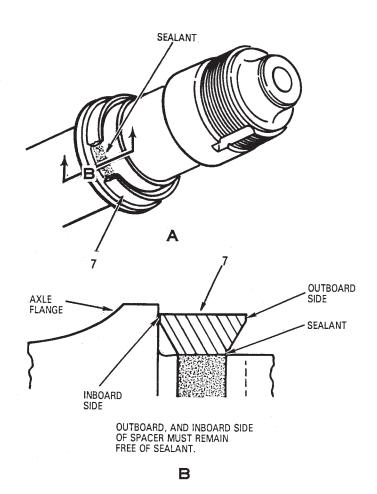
NLG Wheel and Tire Assembly Removal and Installation (Sheet 2)
